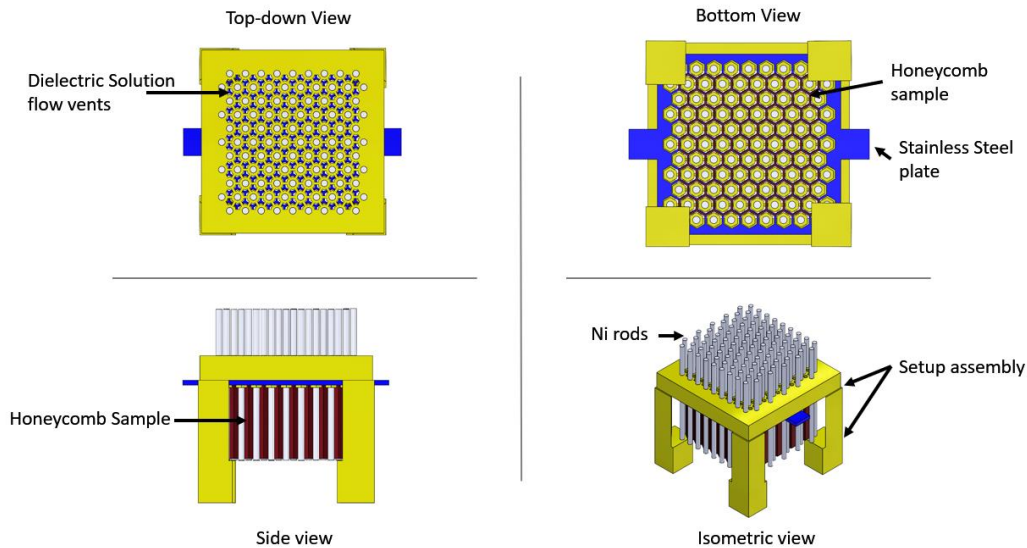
Electrolytic unit cell setup. The indicated yellow parts are the setup assembly parts that were 3D printed from PLA/PHA. The blue colored part is the stainless-steel plate that has the accurate hexagonal cutout pattern so it could fit snugly within the spaces between the protrusions.
